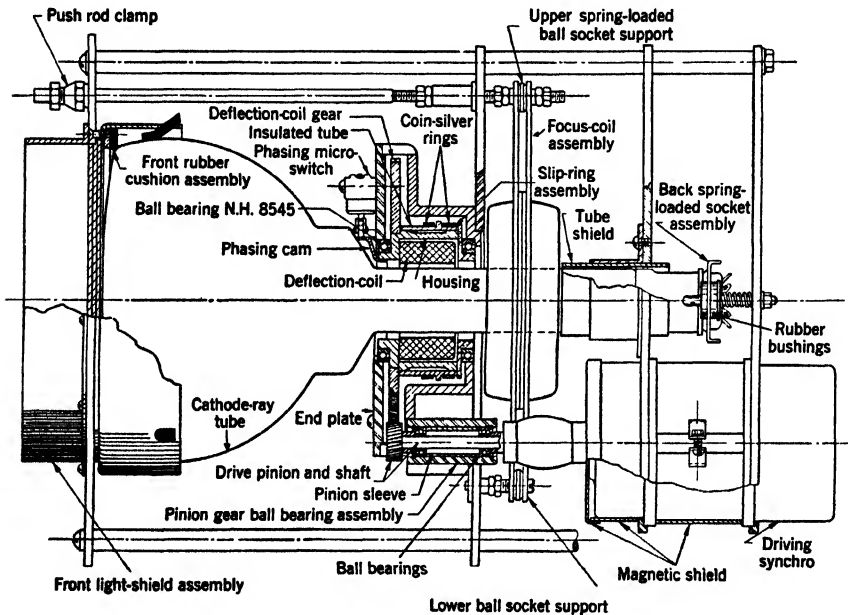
Rotating-coil cathode-ray-tube mount.
